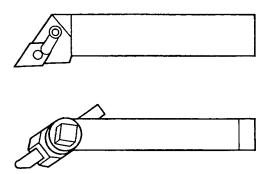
Top: Right-hand Offset-shank, Indexable Insert Holder Bottom: Right-hand Offset-shank Tool-bit Holder
